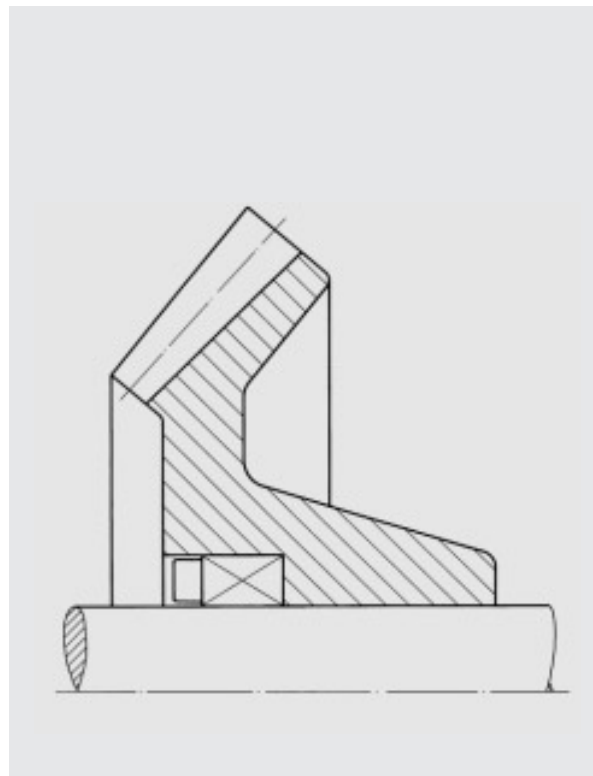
· Bevel gear mounted using one Locking Assembly RfN 7012. In this case the Locking Assembly transmits both the torque and the tooth pressure axial component.
